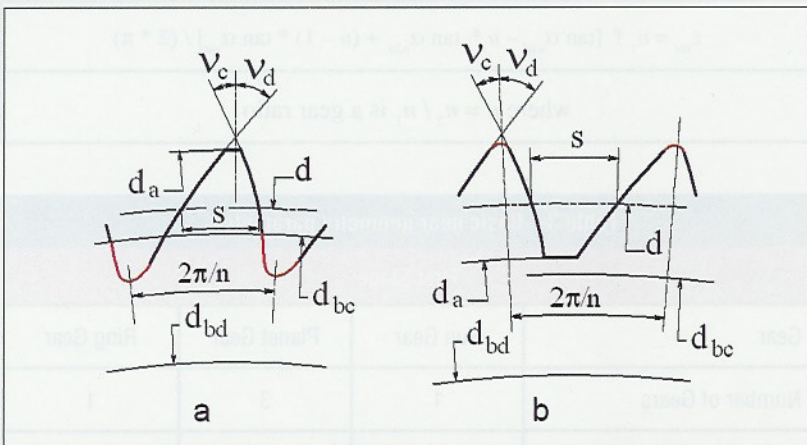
Asymmetric tooth profile (the fillet portion is red); a—external tooth; b—internal tooth; d_a —tooth tip circle diameter; d_b —base circle diameter; d —reference circle diameter; s —circular tooth thickness at the reference diameter; v —involute intersection profile angle; subscripts “a” and “c” are for the drive and coast flanks of the asymmetric tooth.
